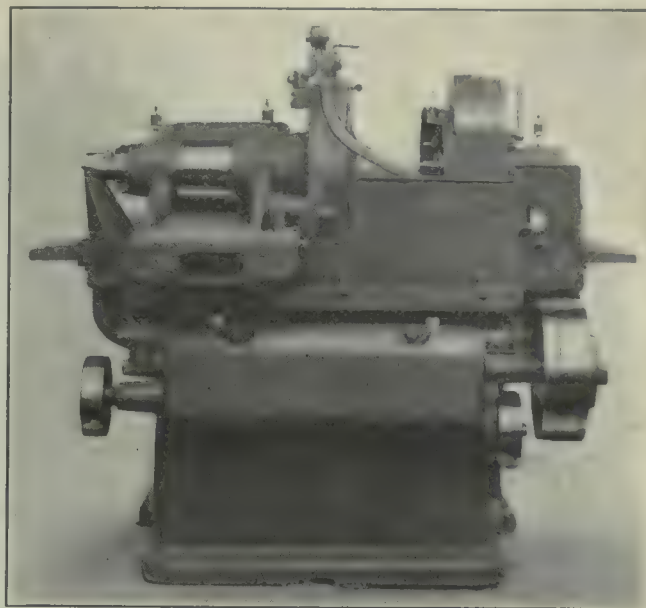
REAR VIEW OF CINCINNATI CYLINDRICAL GRINDING MACHINE
